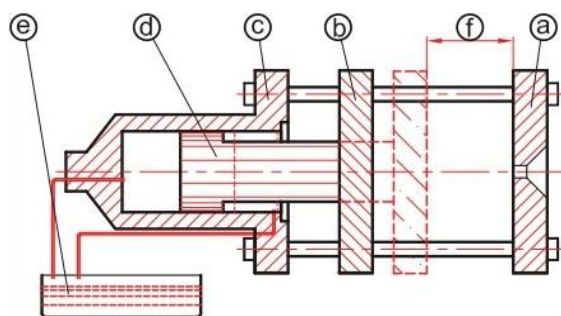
Injection machine, a fixed plate, b moving plate, c hydraulic system, d piston, e oil tank, f minimum clamp
